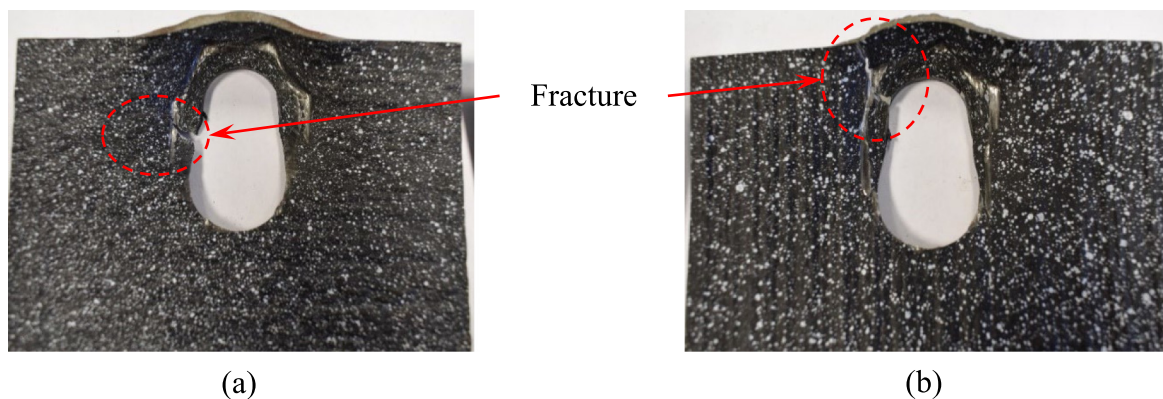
(a) Localised tearing in specimen S3-105-33-90 and (b) shear-out failure in specimen S3-105-33-0.
